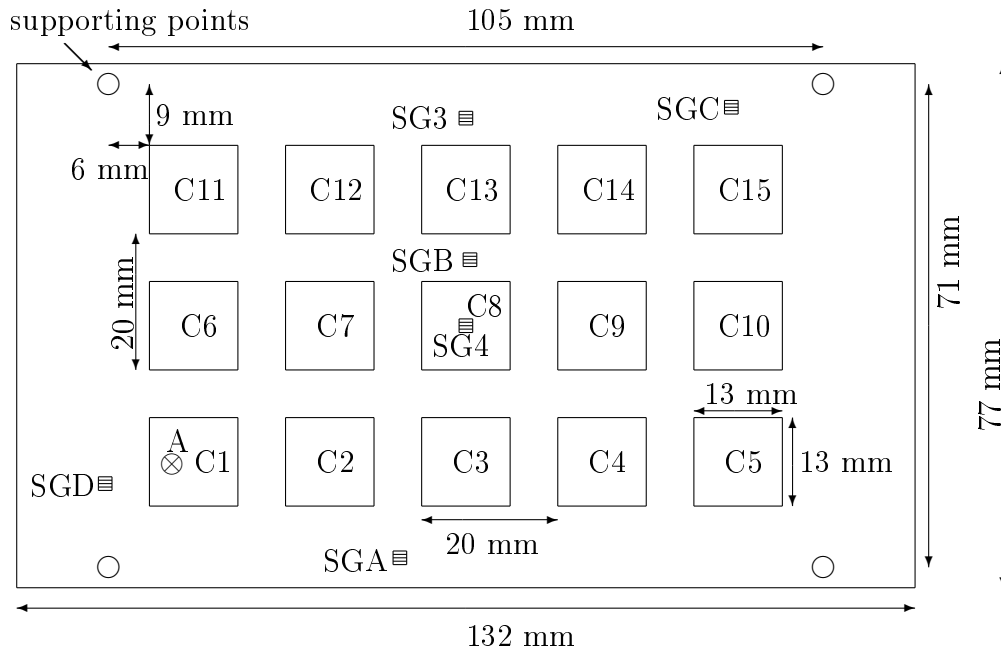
Board layout: the dimensions and the locations of the components (C1-15), the strain gauges (SGA-D,3,4), and the accelerometer (A).
